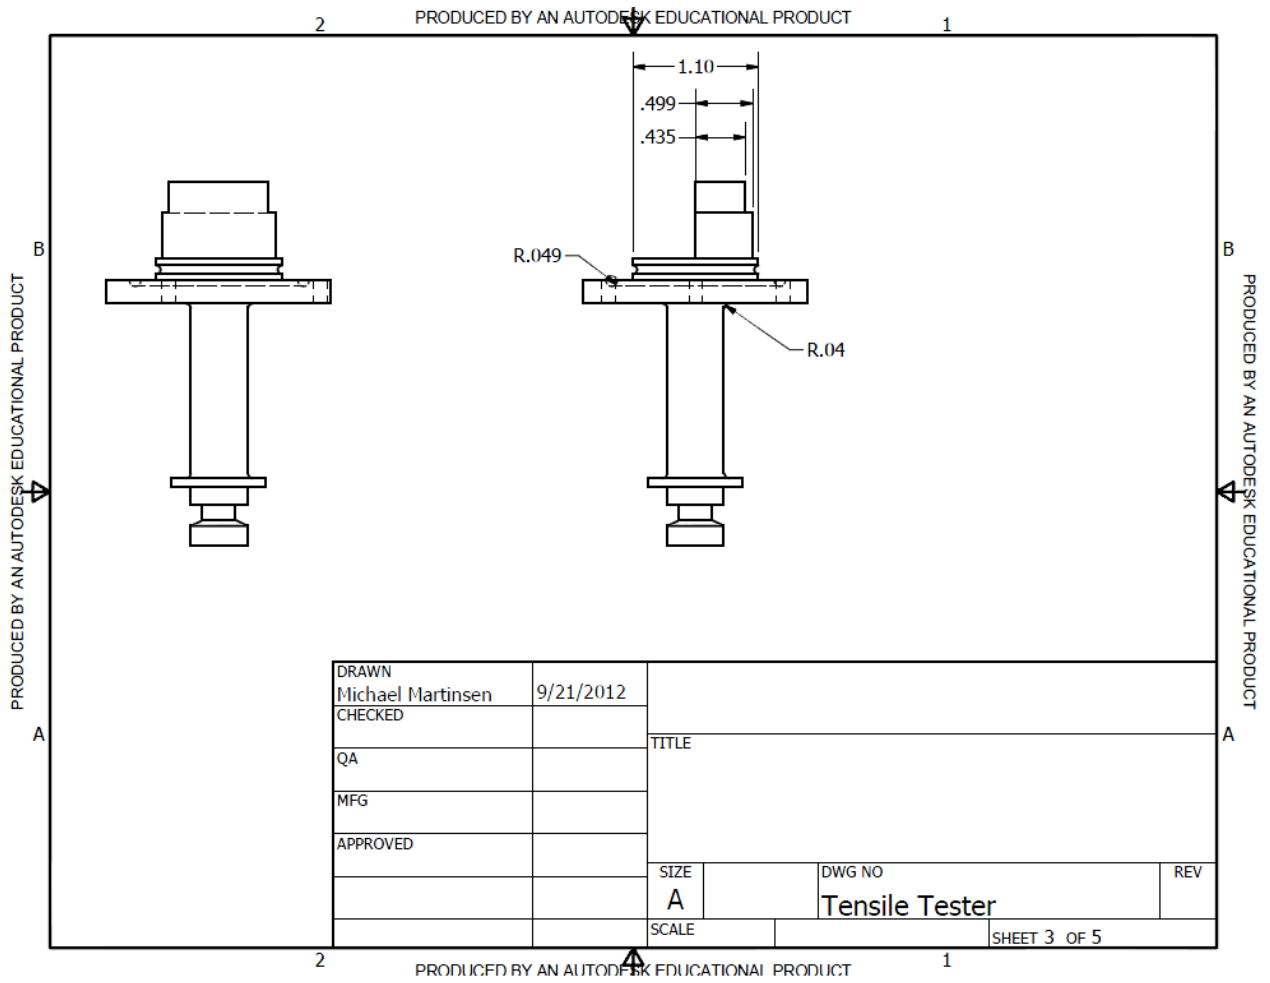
ENGINEERING DRAWING TENSILE TESTER (SIDE VIEW)
